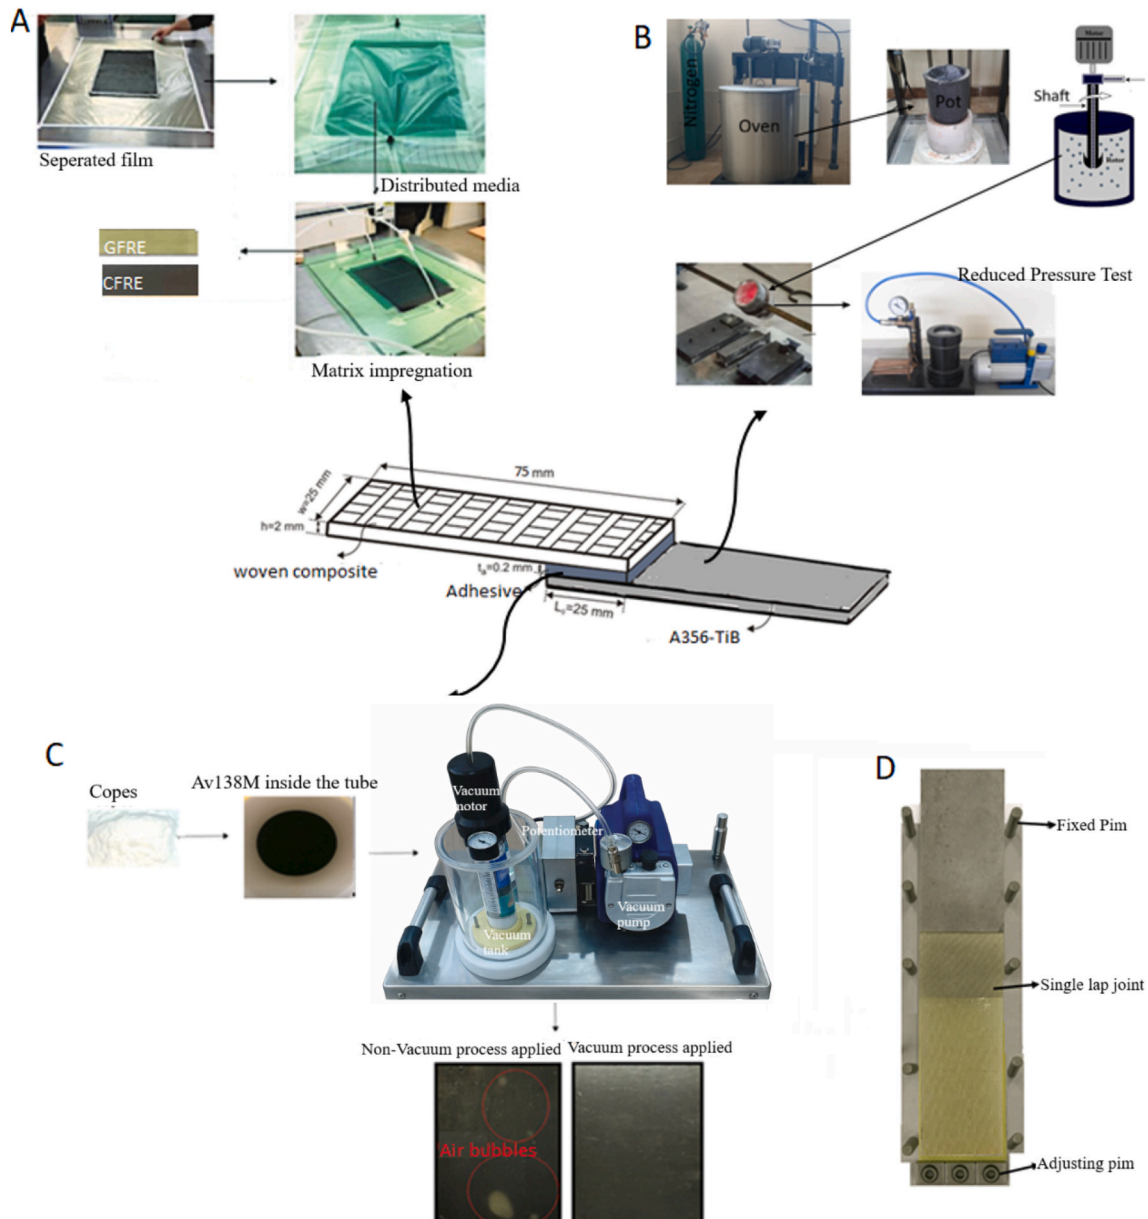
Manufacturing steps for single lap joint (a) Casting process (b) VARTM (c) Vacuum mixing (d) Molding.
